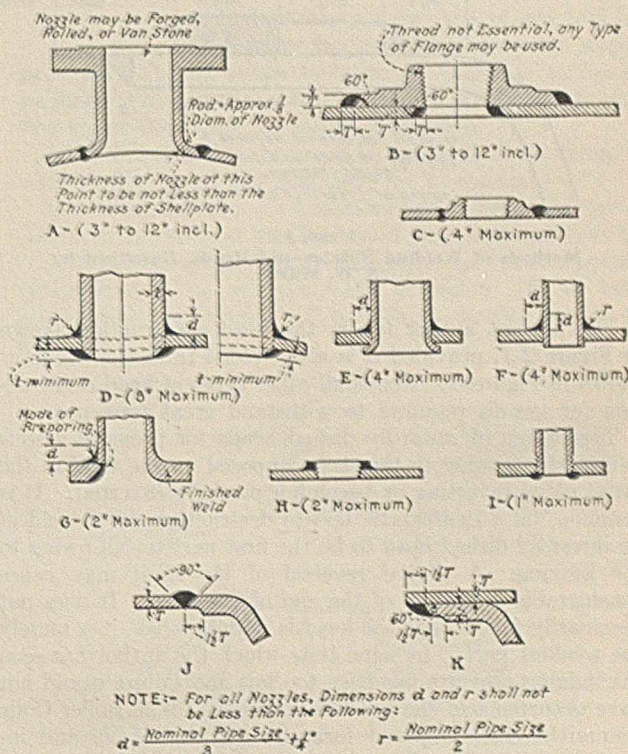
Methods of Autogenously Welding Nozzles and Heads, Specified by A. S. M. E. Code
